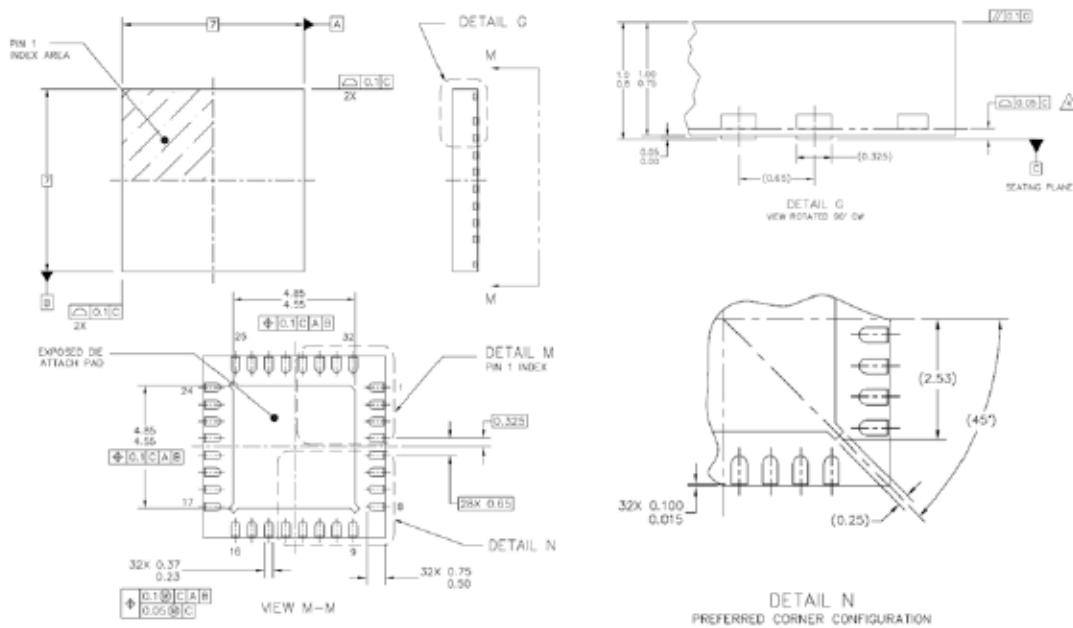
DFN/QFN Case Outline Drawing Example (7 mm x 7 mm, 32 Lead)
